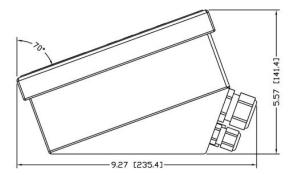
IND780 Harsh Enclosure Terminal Dimensions, Side
